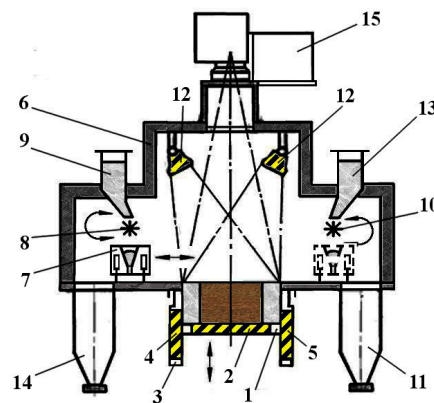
Schematic view of the SLS machine for manufacturing parts made of the PEEK powder: 1—platform, 2—heater, 3—changeable frame, 4 and 5—heaters, 6—airtight chamber, 7—double-knife recoater, 8—splined shaft, 9—powder delivery hopper, 10—splined shaft, 11—powder collection hopper, 12—top heaters, 13—powder delivery hopper, 14—powder collection hopper, and 15—laser-optical unit.
